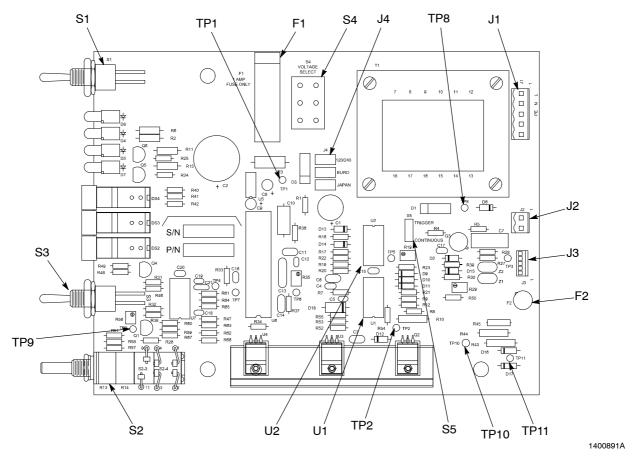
Circuit Board Test Points, Jumpers, Switches, Fuses, and Connectors
